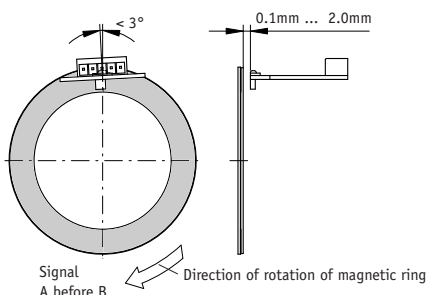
Definition of the counting direction with magnetic ring and assemblage sensor/magnetic ring, gap measure, tolerances
